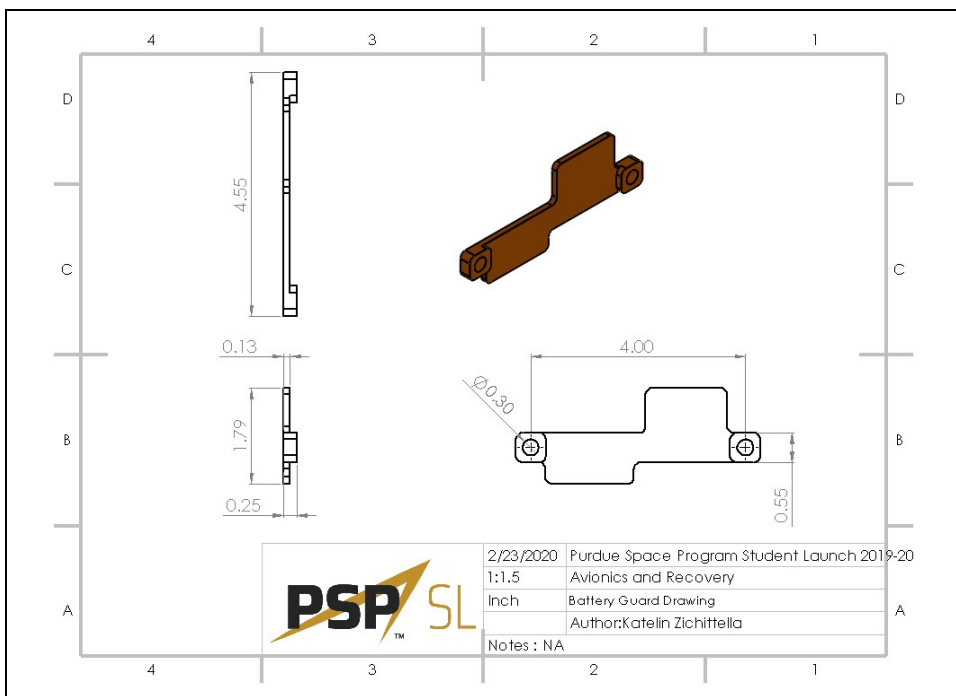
Altimeter Battery Guard Dimensional Drawing
